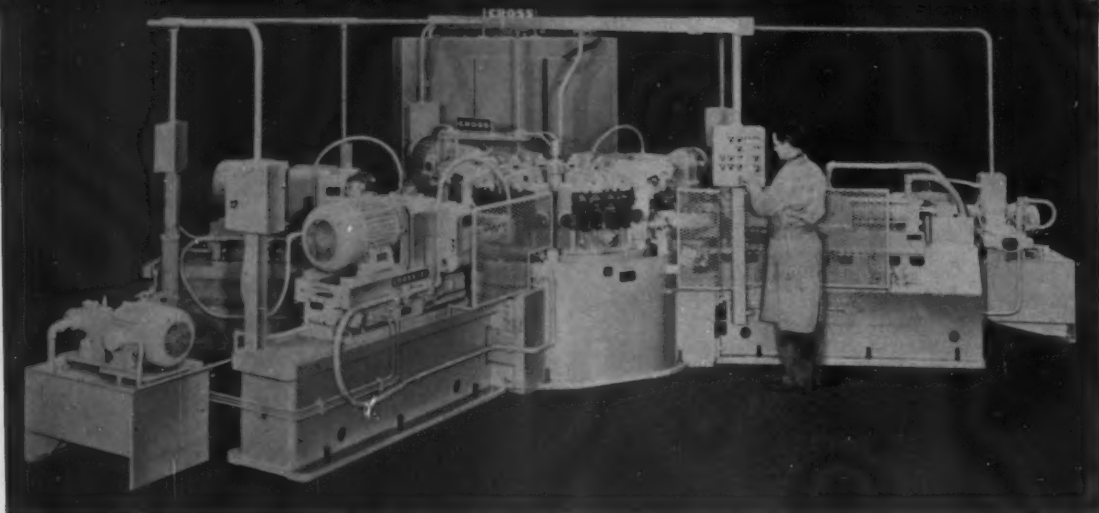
Cross dial type machine that reduced cost of connecting-rods by including broaching operations
